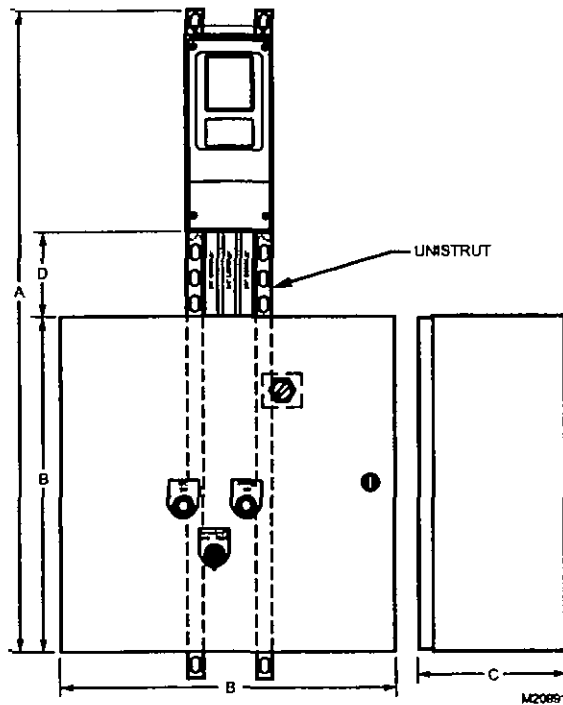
Dimensions of the NXS NEMA1 Assemblies
